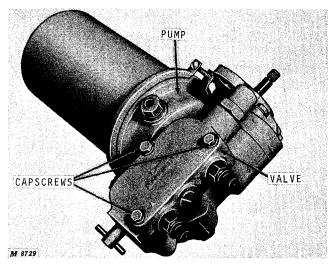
Separating Valve Assembly from Pump-90-Degree Unit
